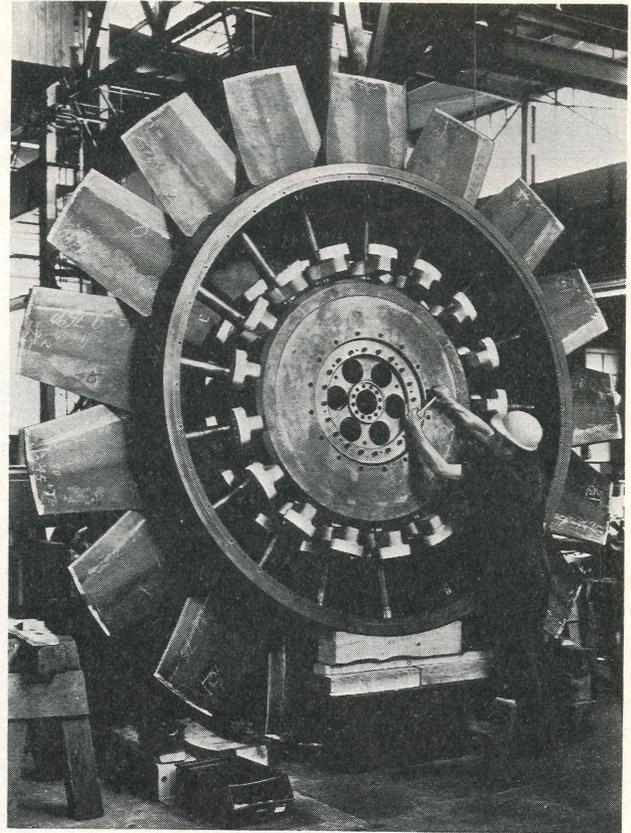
Large mechanical draft axial impeller as viewed from entering air side
